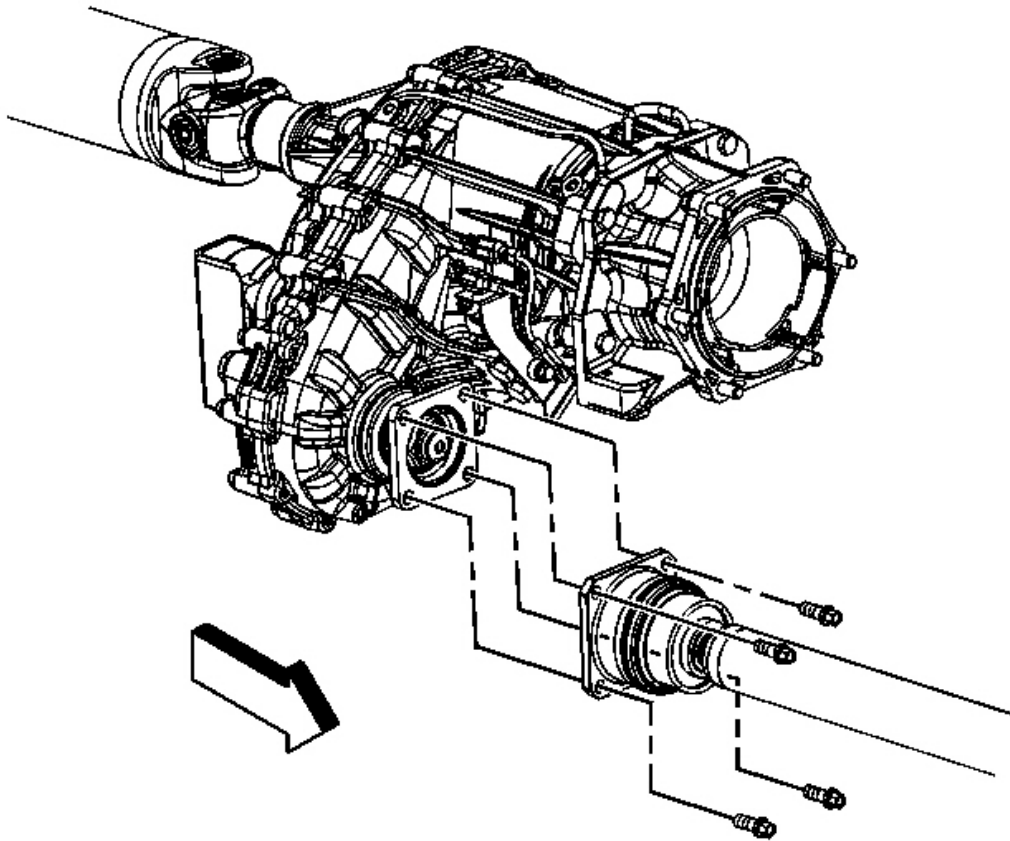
Removing/Installing Propeller Shaft Retaining Bolts
